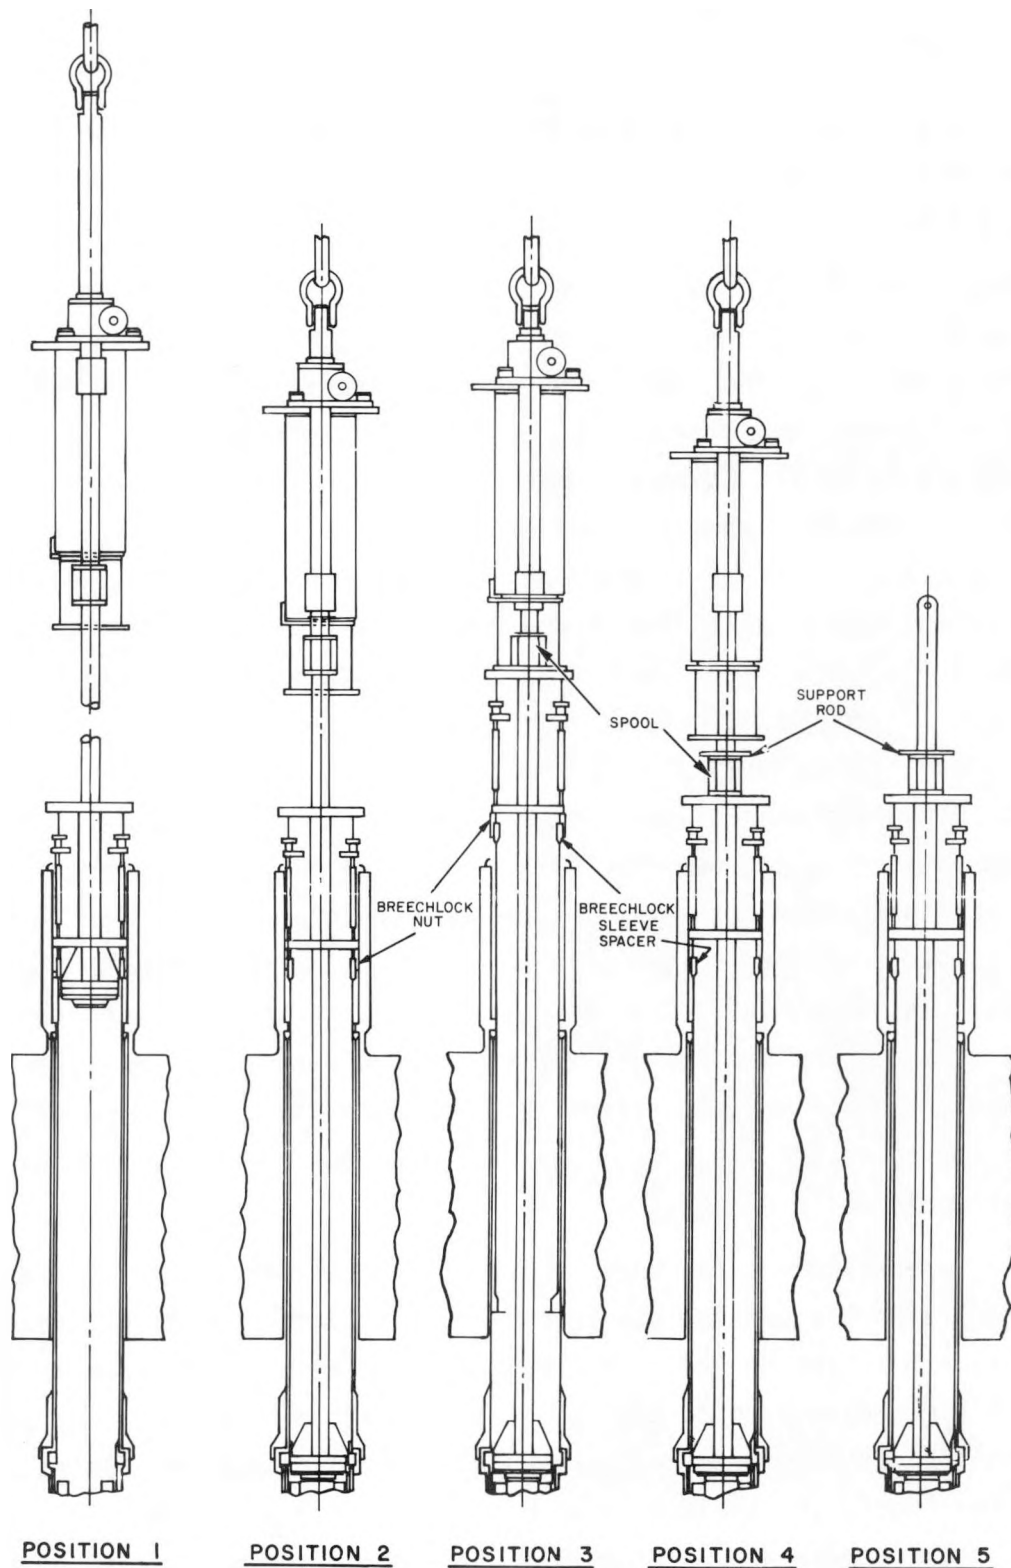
Operating Sequence for Breechlock Sleeve Disassembly and Module Lowering
